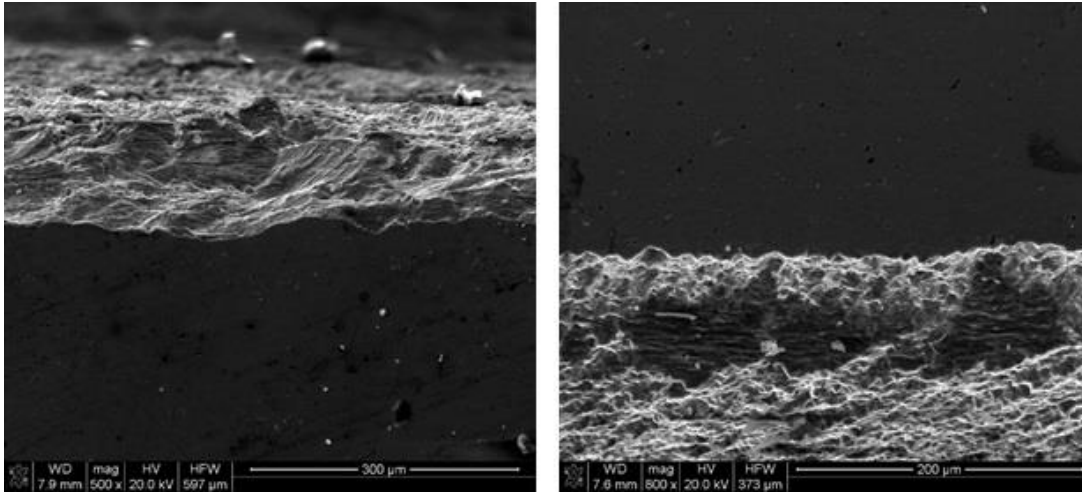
Fracture surface at the vicinity of the  $\Delta K_{th}$  for
